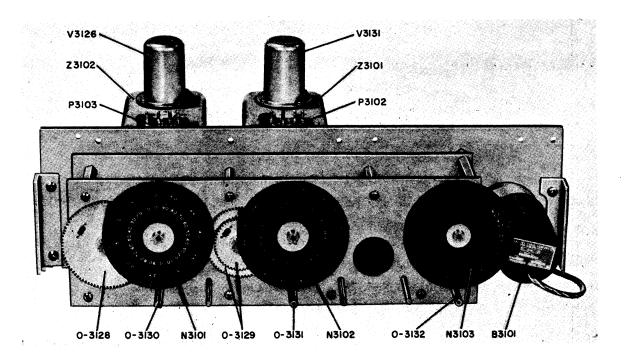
R-F Oscillator O-243/FRT-24, Top View of Dial Gears, Location of Parts
